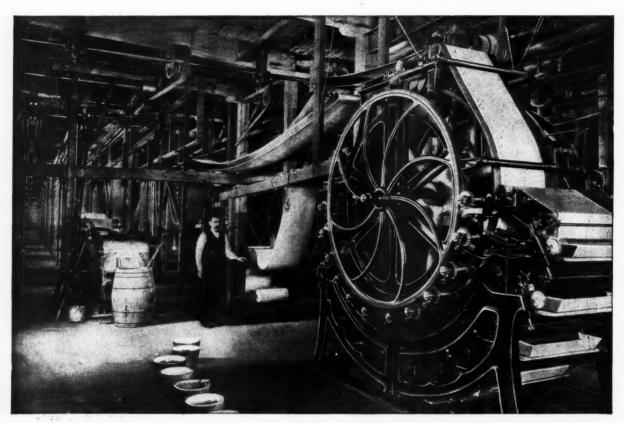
WALL-PAPER PRINTING MACHINE.
